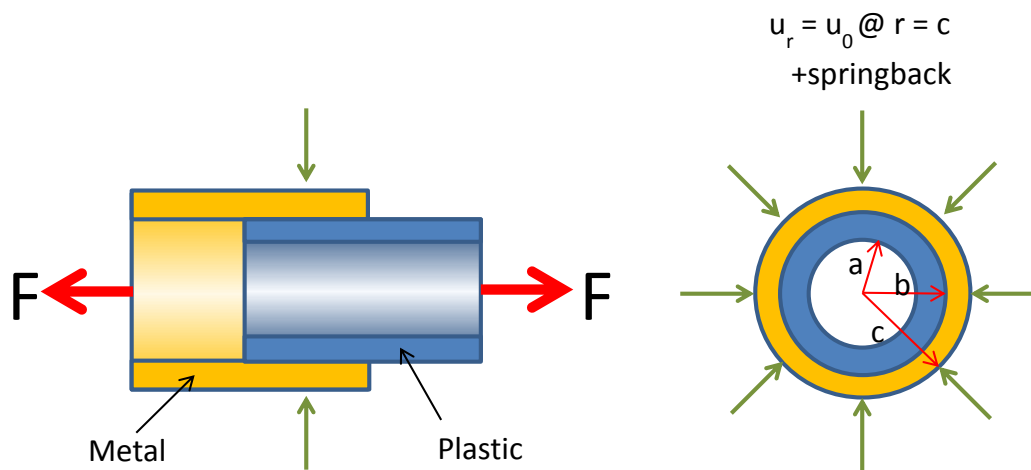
Schematic View of Crimped Joint (x-section on left)
